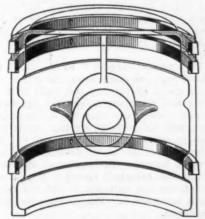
Diagram showing the correct way of installing the Ford oversize piston rings
